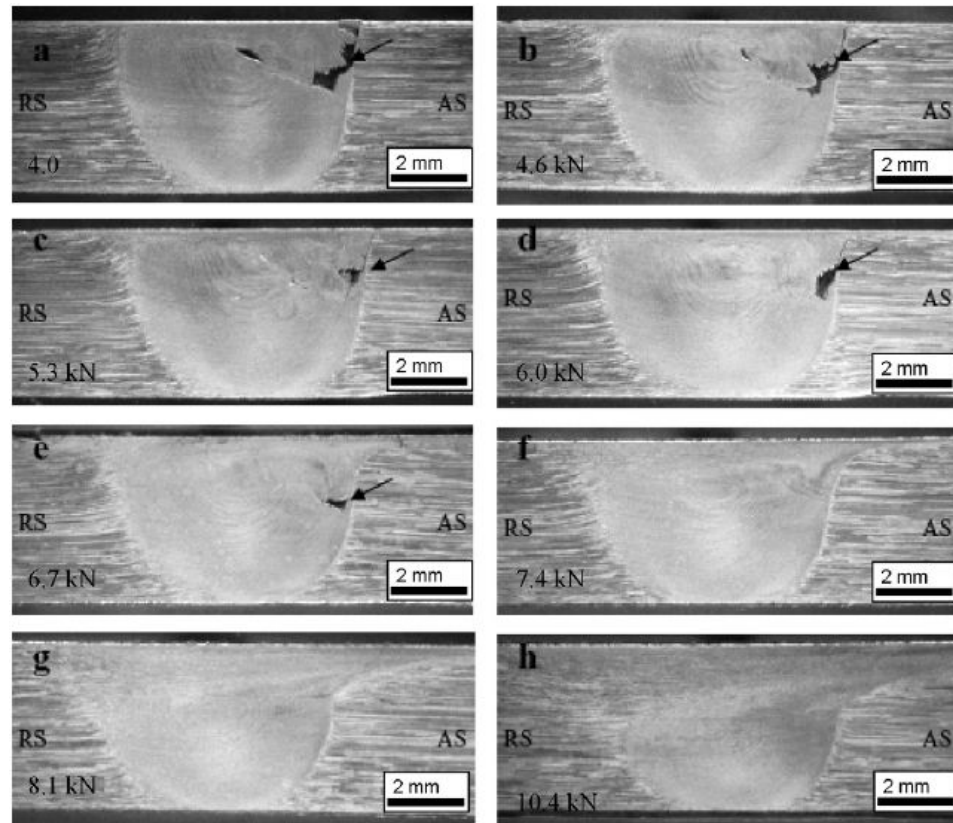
Macrostructure of cross sections of 6061 Al FSW joints, showing the weld quality at various welding parameters and tool types [57]
